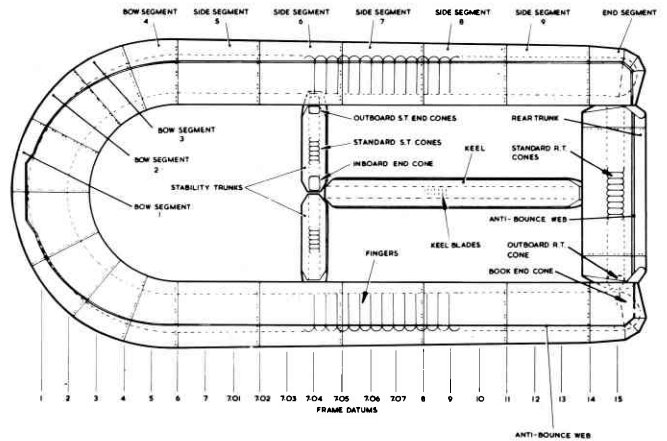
SR.N4 Mk.3 SKIRT PLAN
